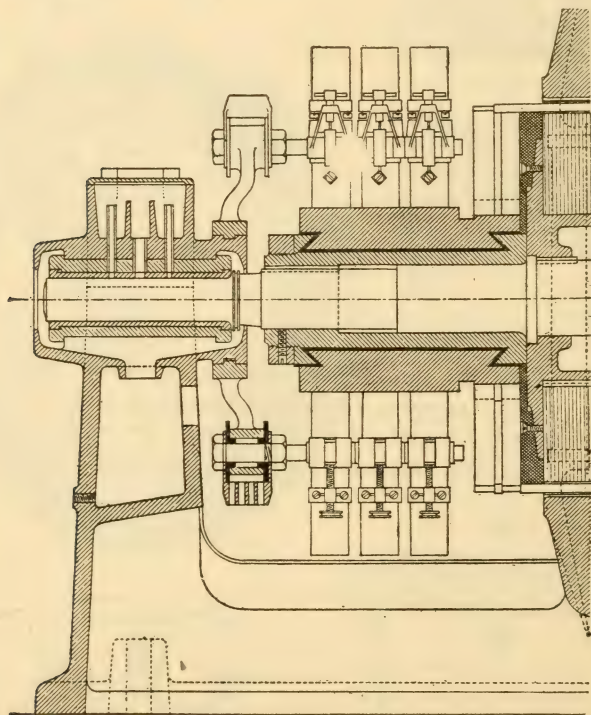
SECTION OF COMMUTATOR AND BRUSH MOUNTING.
